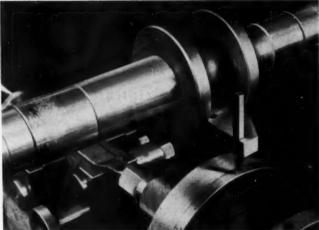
Special stamp holder that can be set up on a milling machine to mark dials.
